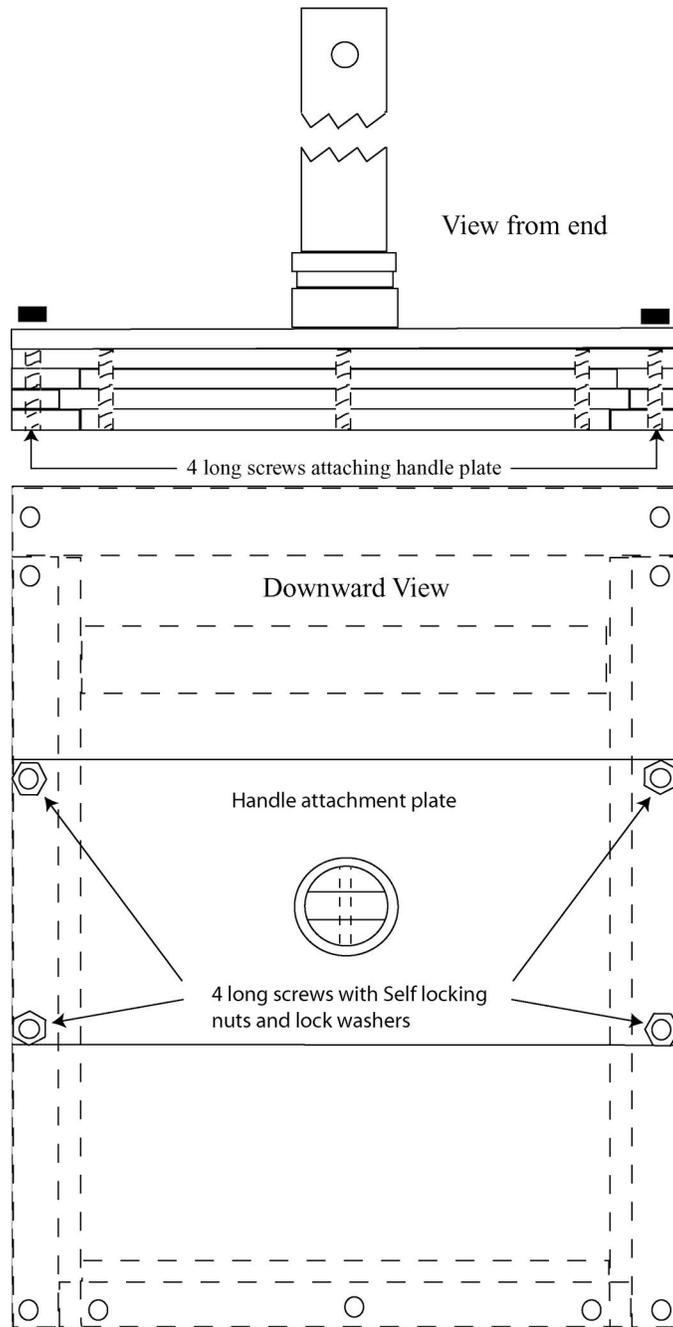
The handle attachment plate is shown securely fastened to the sampler body with four long screws, lock washers, and self locking nuts.
